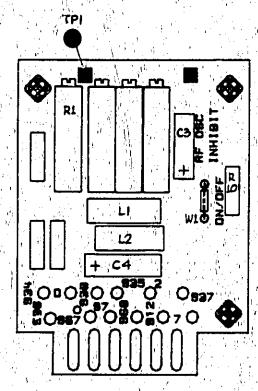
, P/O A3A4 Connector Board Assembly Component Locations (P/O CHANGE 36)
